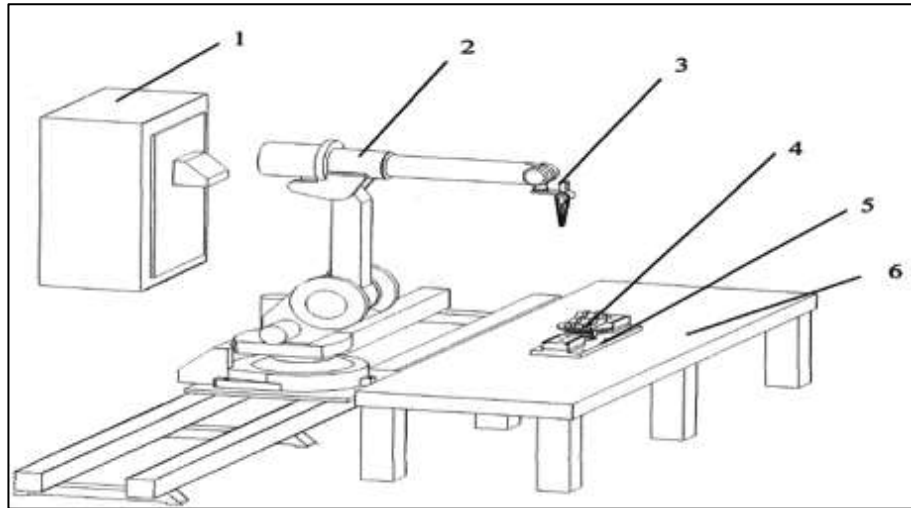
The architecture of the robotic finishing system: 1-controller; 2-articulated manipulator; 3-finishing tool; 4-SLS part; 5-fixture; 6-platform.[111]
